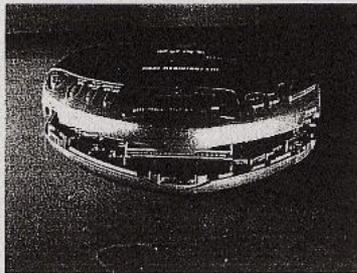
Successful active disassembly of the macro assembly of the Sony CD player.
